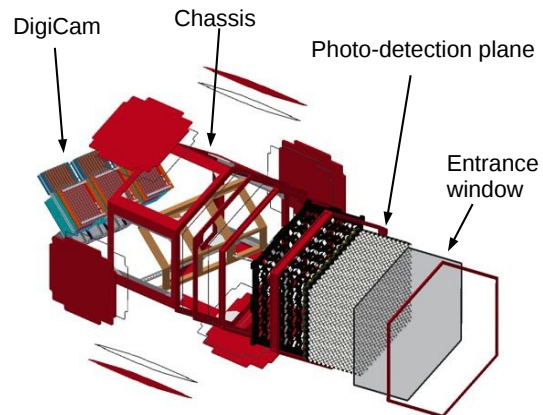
Exploded view CAD drawing of the SST-1M camera.
